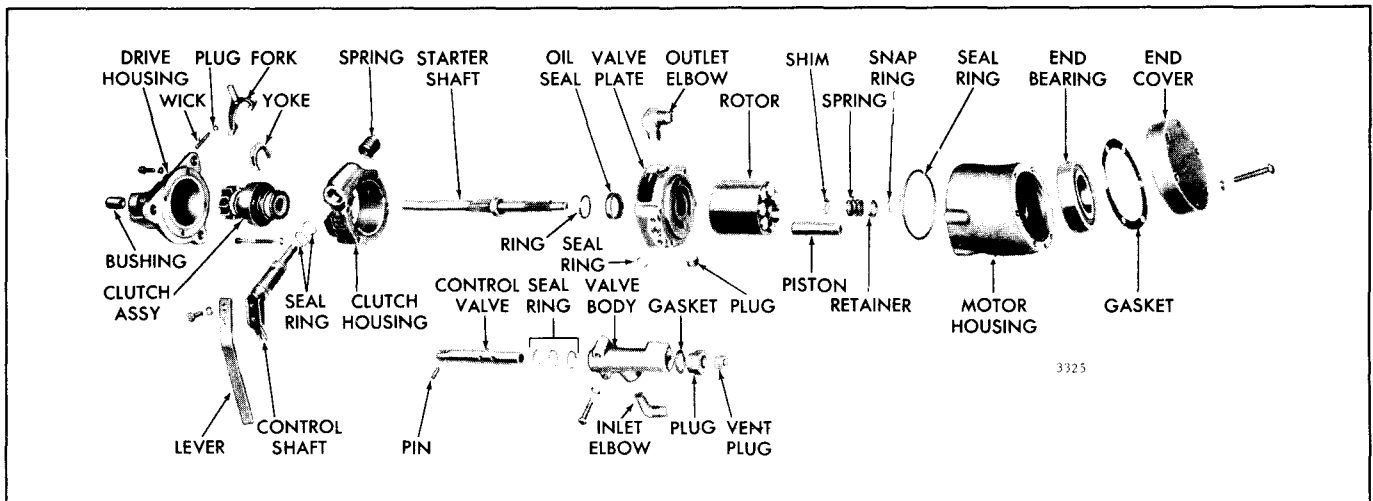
Hydrostarter Motor Details and Relative Location of Parts ("20" Series Motor Shown)
